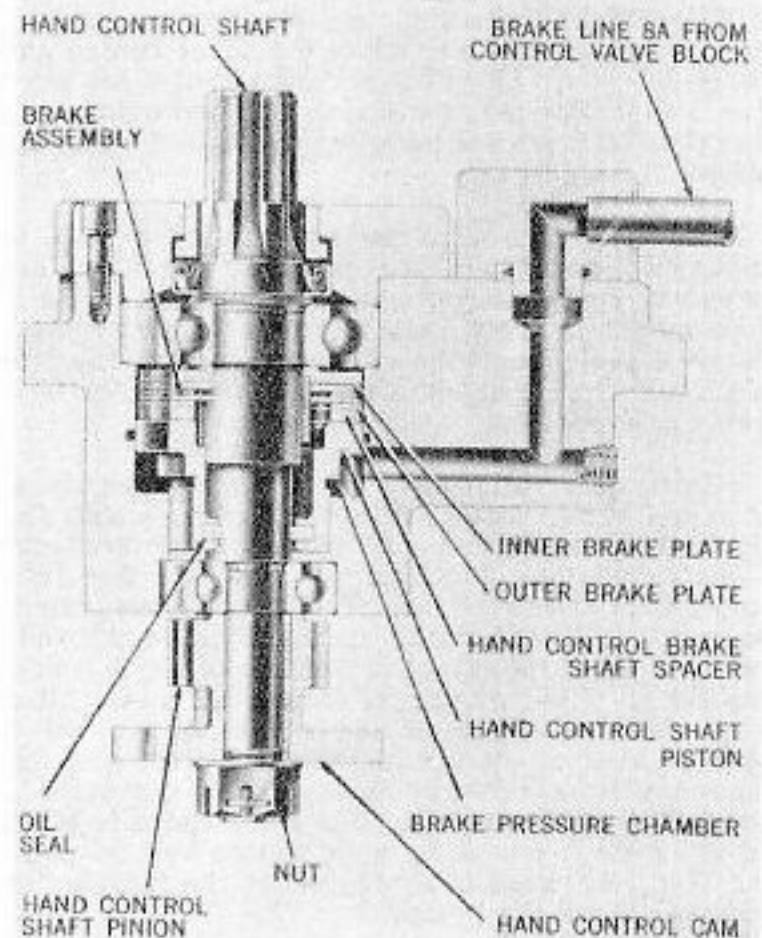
Hand Control Shaft Assembly, Sectional View
